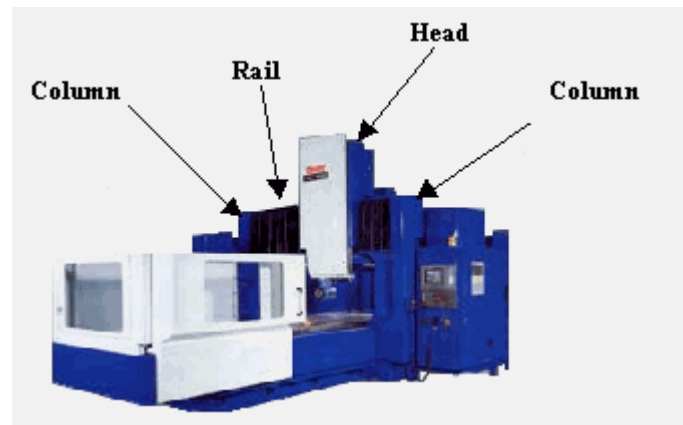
CNC Vertical Bridge-Type Milling Machine.
